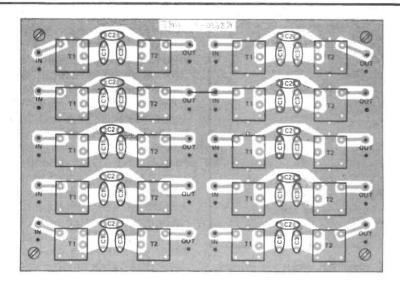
The component overlay of the filter PCB showing one basic filter and one cascaded filter. Inputs and outputs are via 1mm terminal pins.
